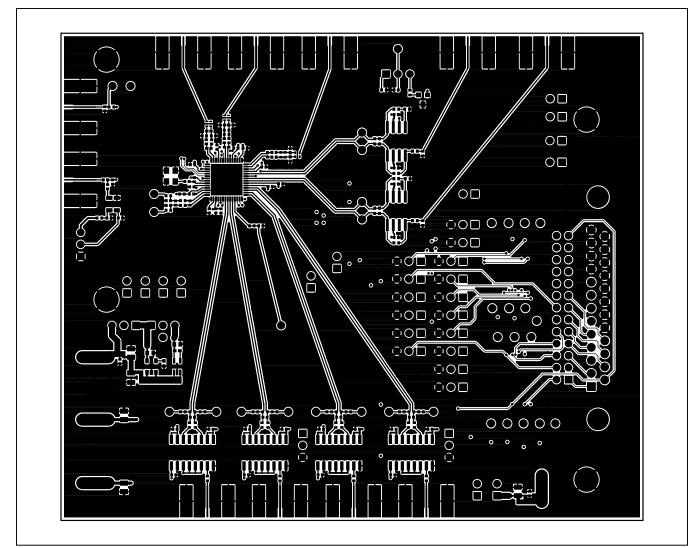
MAX2839 EV Kit PCB Layout—Component Side
